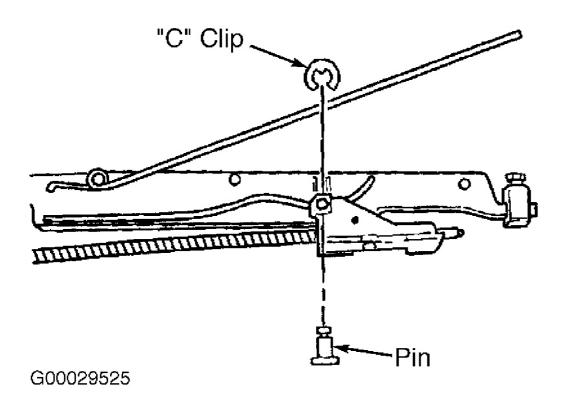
Identifying "C" Clip & Pin Location Courtesy of GENERAL MOTORS CORP.
